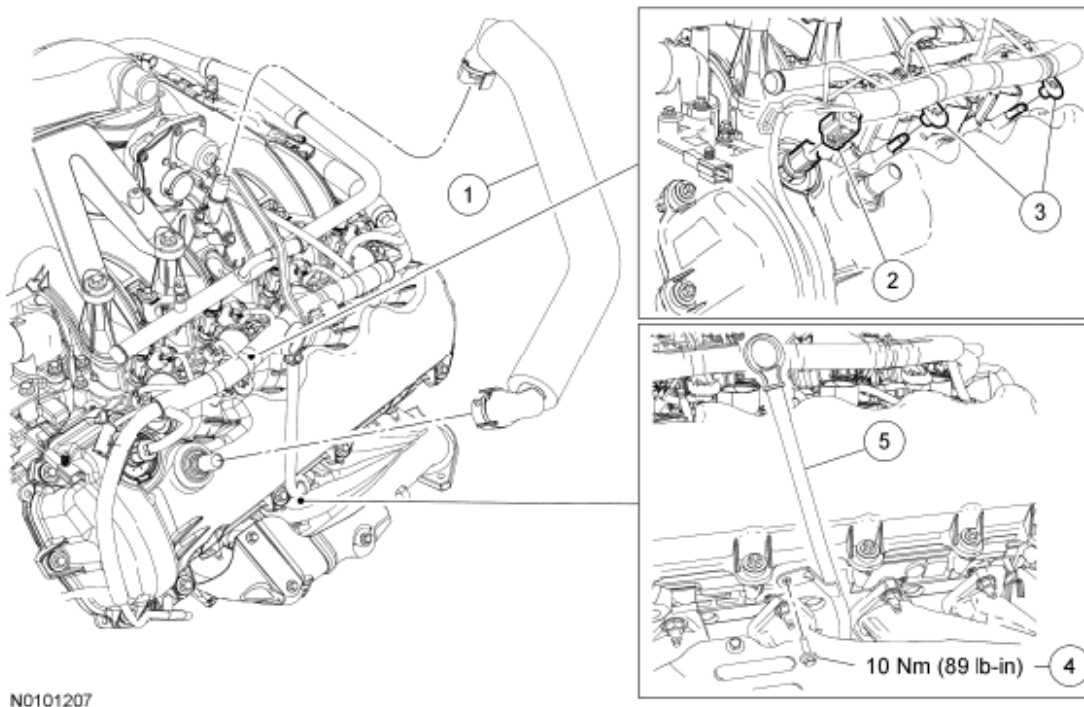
Identifying PCV Tube, Engine Wiring Harness Retainers And Variable Camshaft Timing Solenoid Electrical Connector With Torque Specifications
